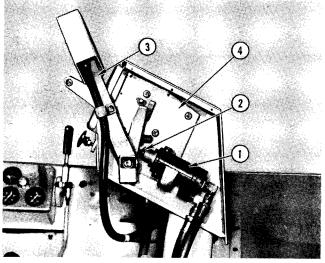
QUICK DROP AIR VALVE, MOUNTED
